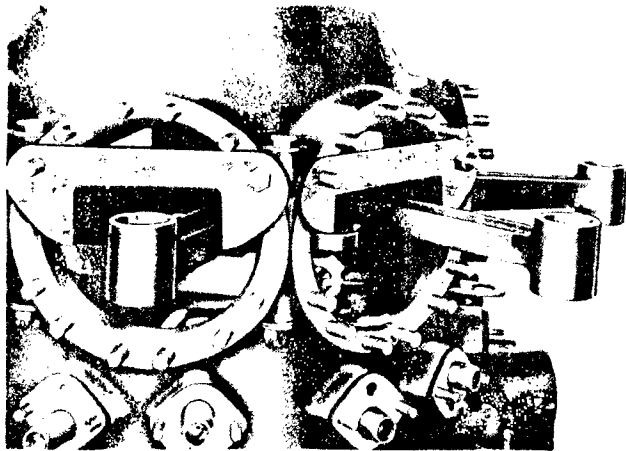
Main Crankcase Assembly Showing Articulating Rod Protector Straps
